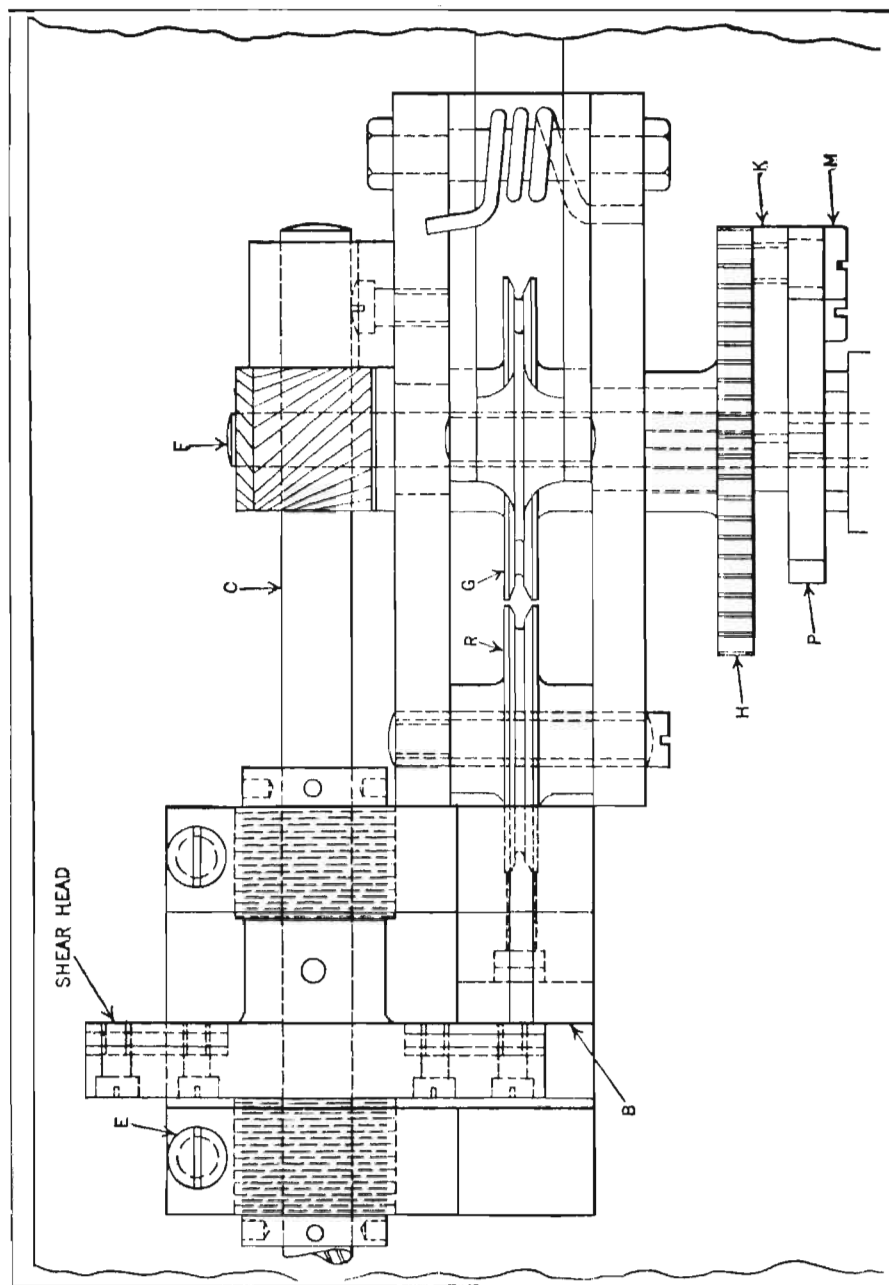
Plan View of Intermittent Wire-feeding Mechanism Shown in Fig. 26
